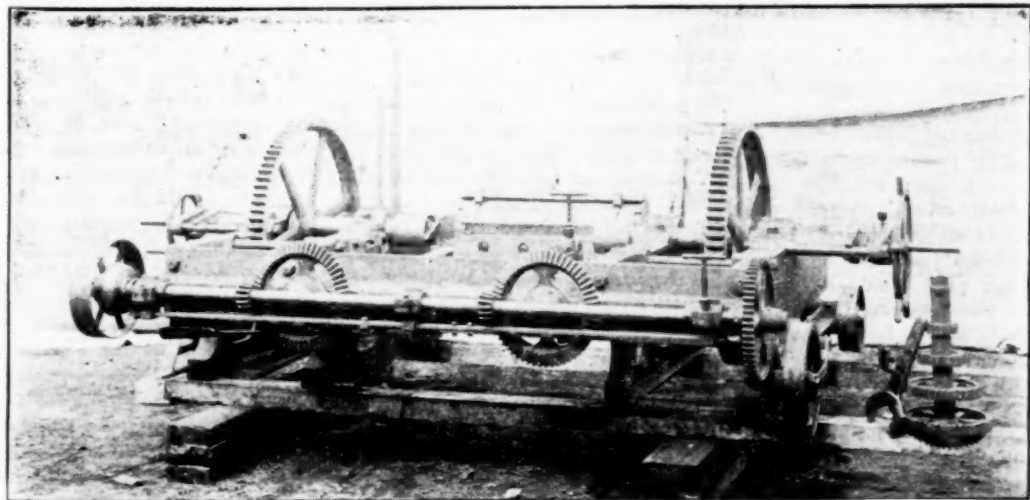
“BLAKESLEE” VENEER CUTTING MACHINE.
